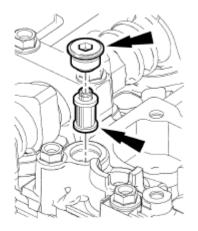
Locating Variable Camshaft Timing Solenoid And Mounting Bolt Courtesy of FORD MOTOR CO.
